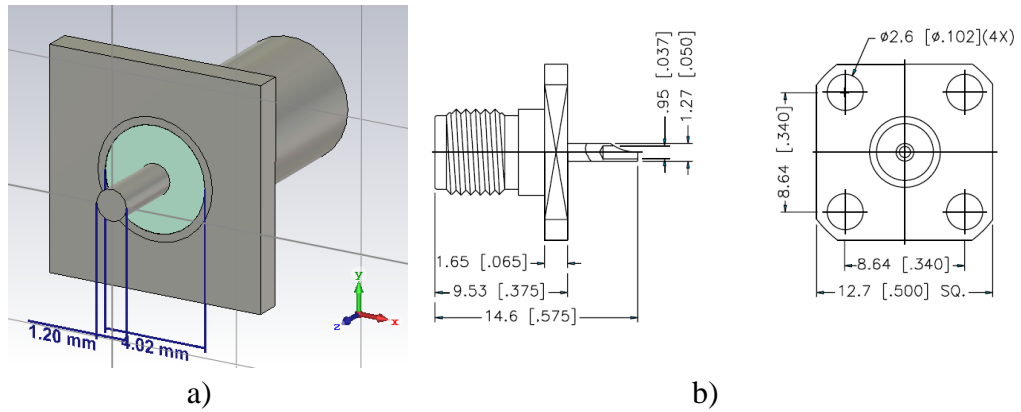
a) Design of the coaxial feed, b) Real dimensions of a SMA connector.
